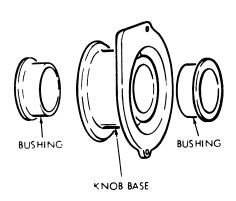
Manual elevation pump arm removal, disassembly, or assembly (2 of 3).
